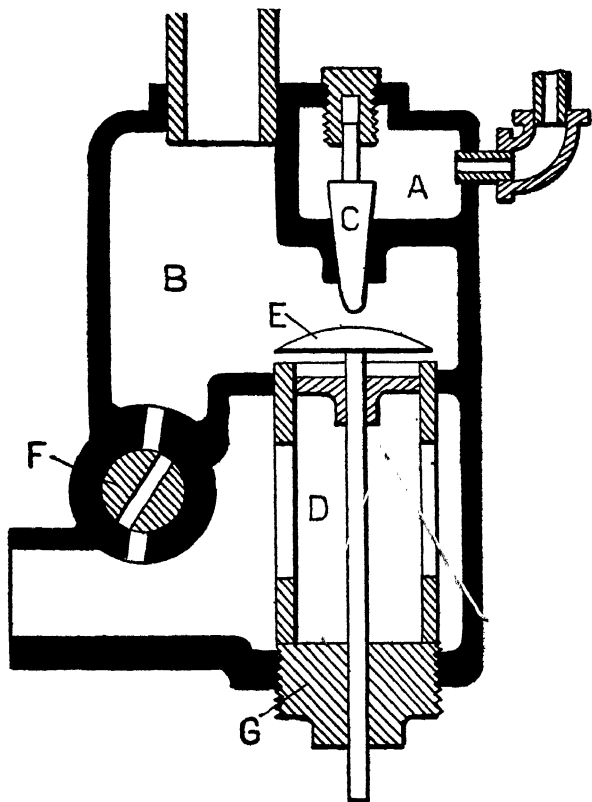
SIMPLE FORM OF CARBURETTER.
